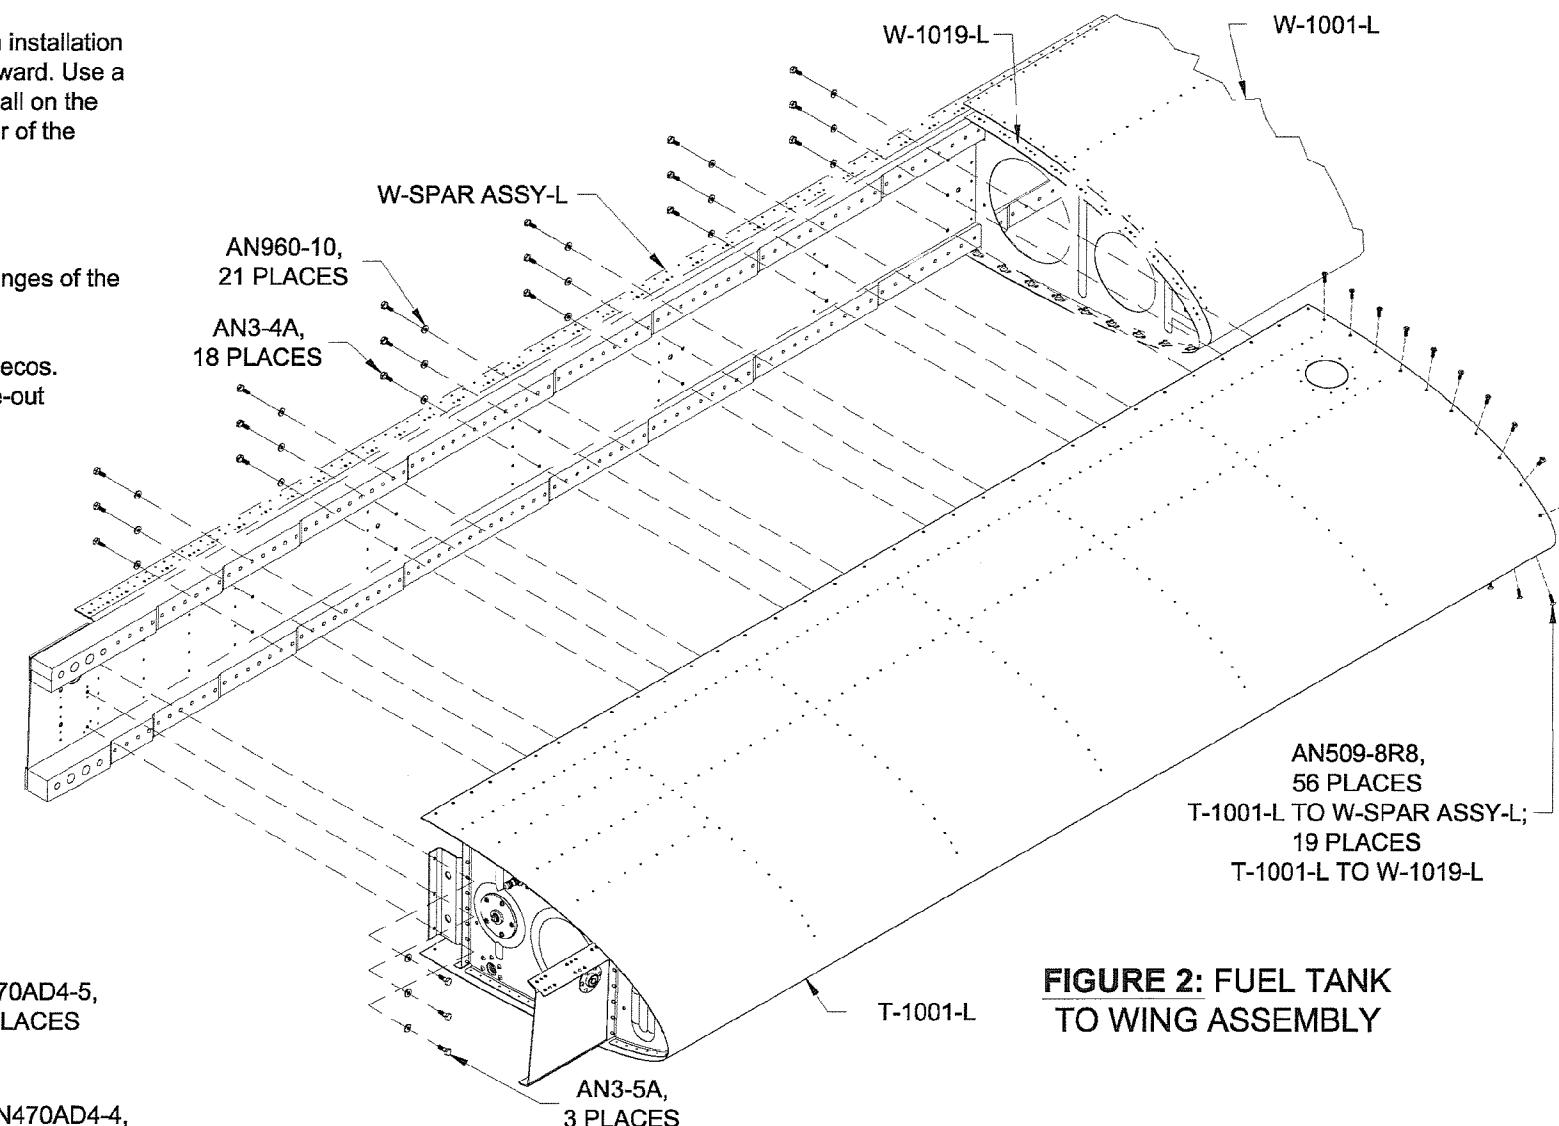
FUEL TANK TO WING ASSEMBLY
